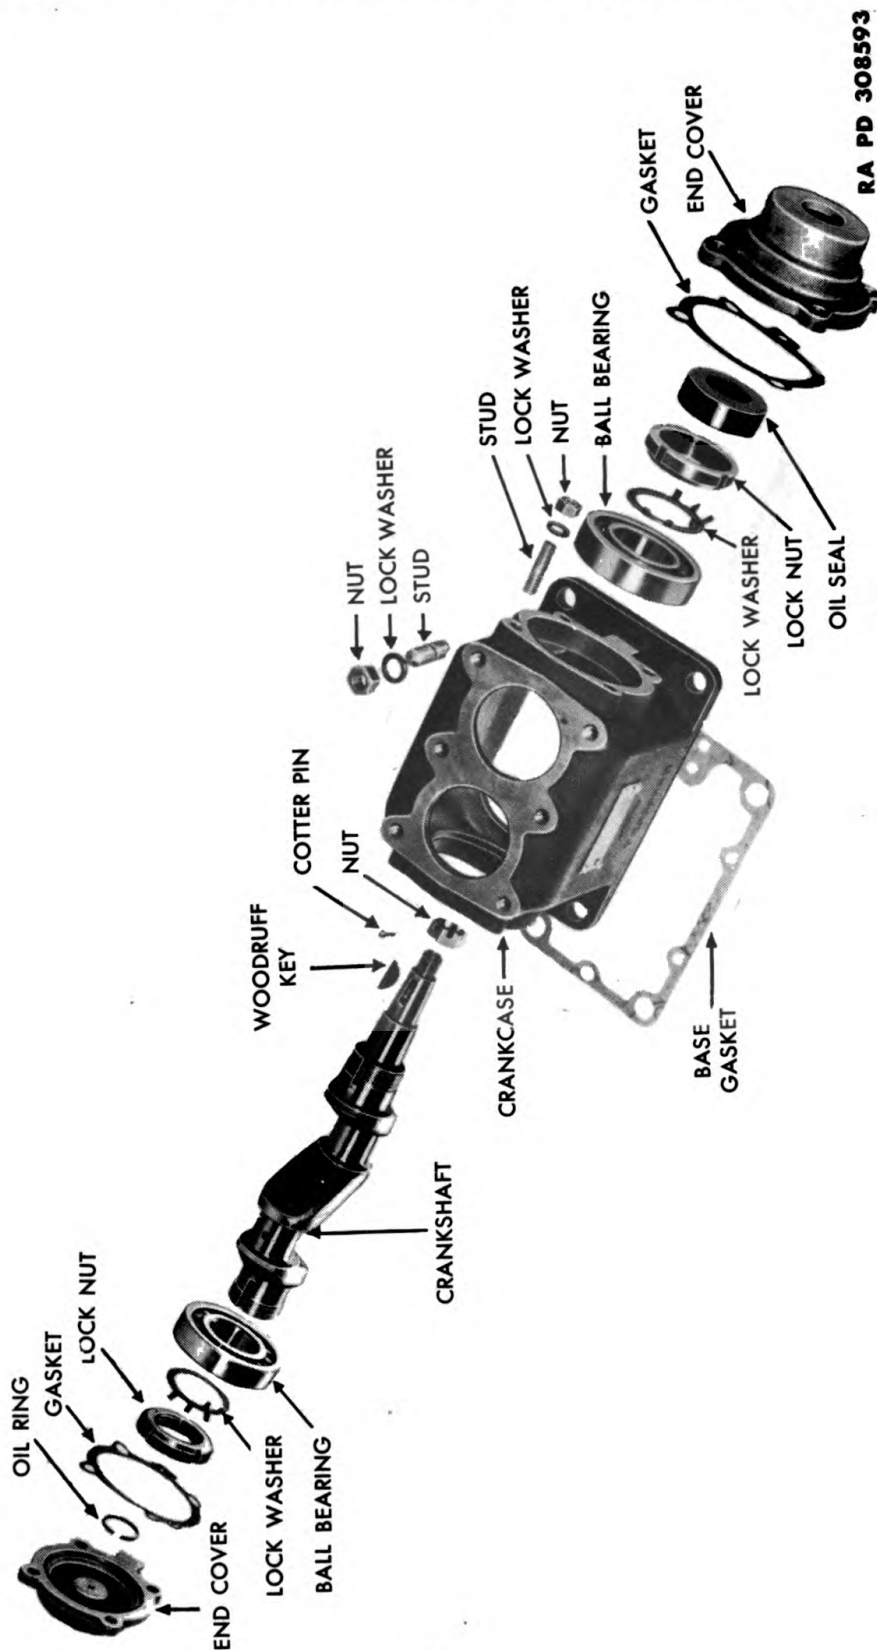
Crankcase Section of a Two-cylinder Compressor Disassembled
